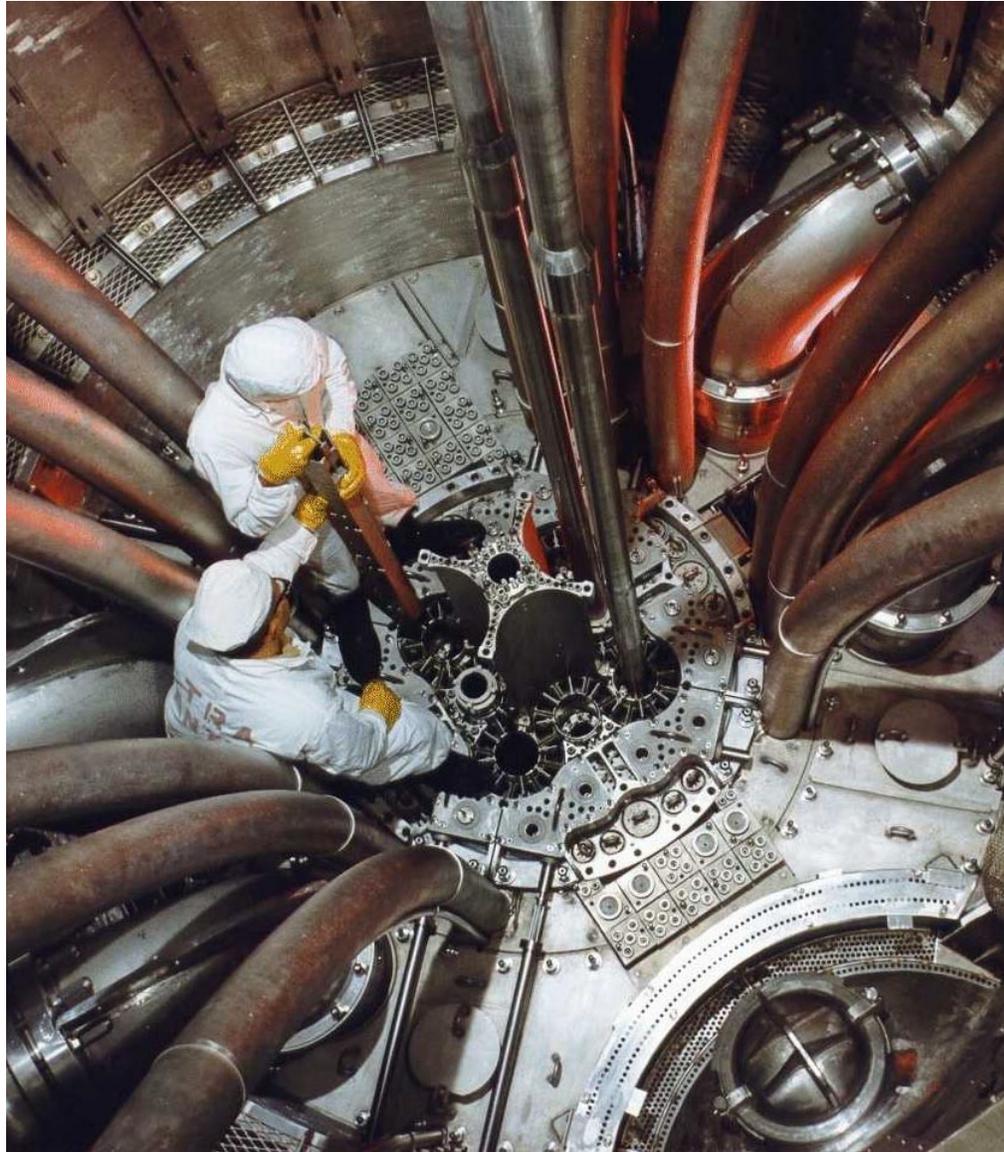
The neck shim rod housing lies at the center of the reactor core, shown here during initial reactor assembly.
